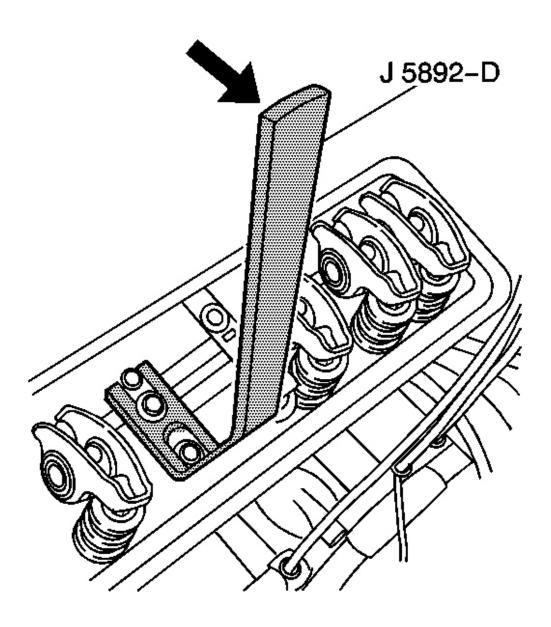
Installing J 5892-D Under Washer On Rocker Arm Bolt Courtesy of GENERAL MOTORS CORP.
